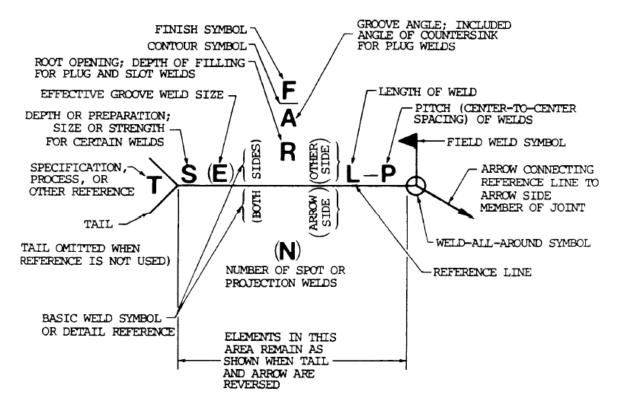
[17] illustrates the elements of a welding symbol that is in accordance with[4].
